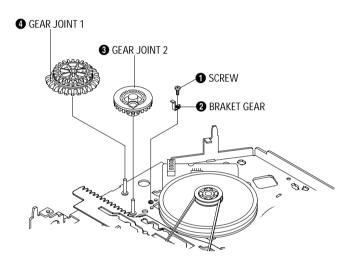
Bracket Gear, Gear Joint 1,2 Removal
